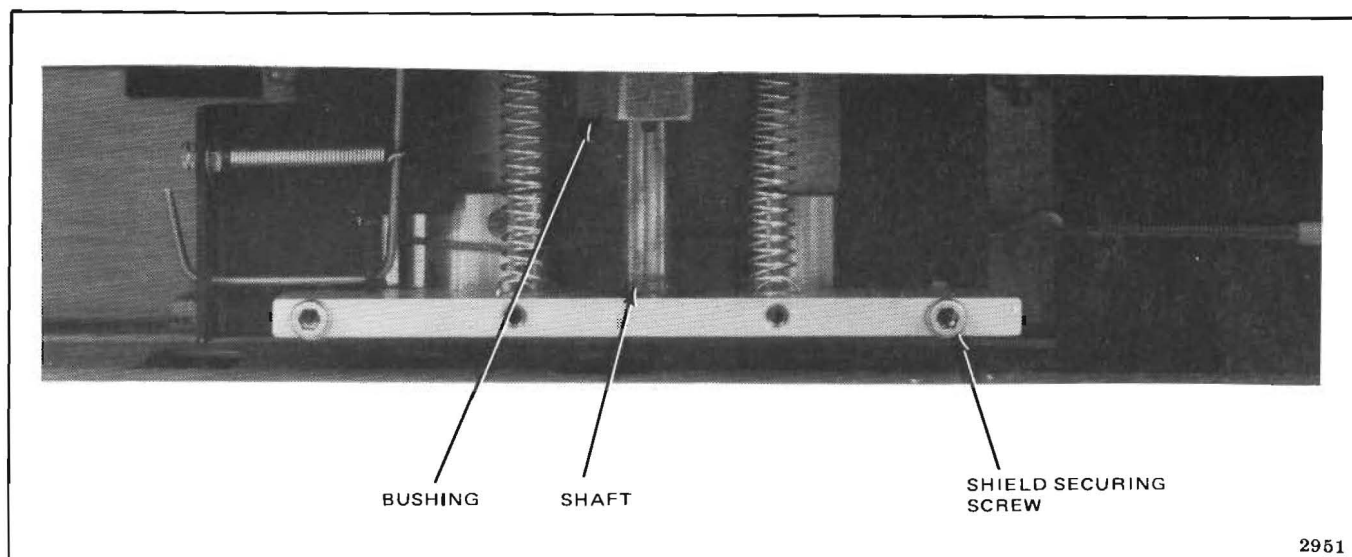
Head Gate in Latched (Down) Position, Front View of Transport
